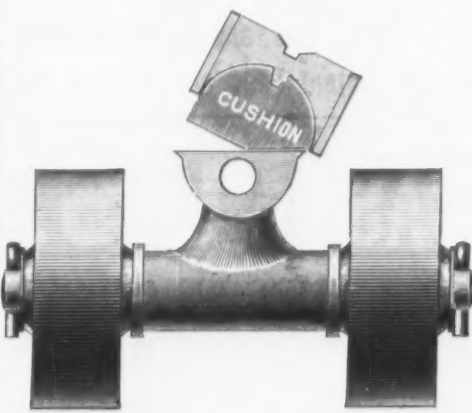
Sectional View of Rocker and Adjustable Box.
